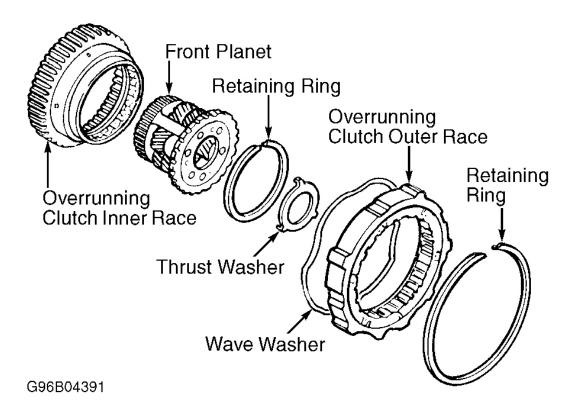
Exploded View Of One-Way (Roller) Clutch & Planetary Carrier Courtesy of FORD MOTOR CO.
